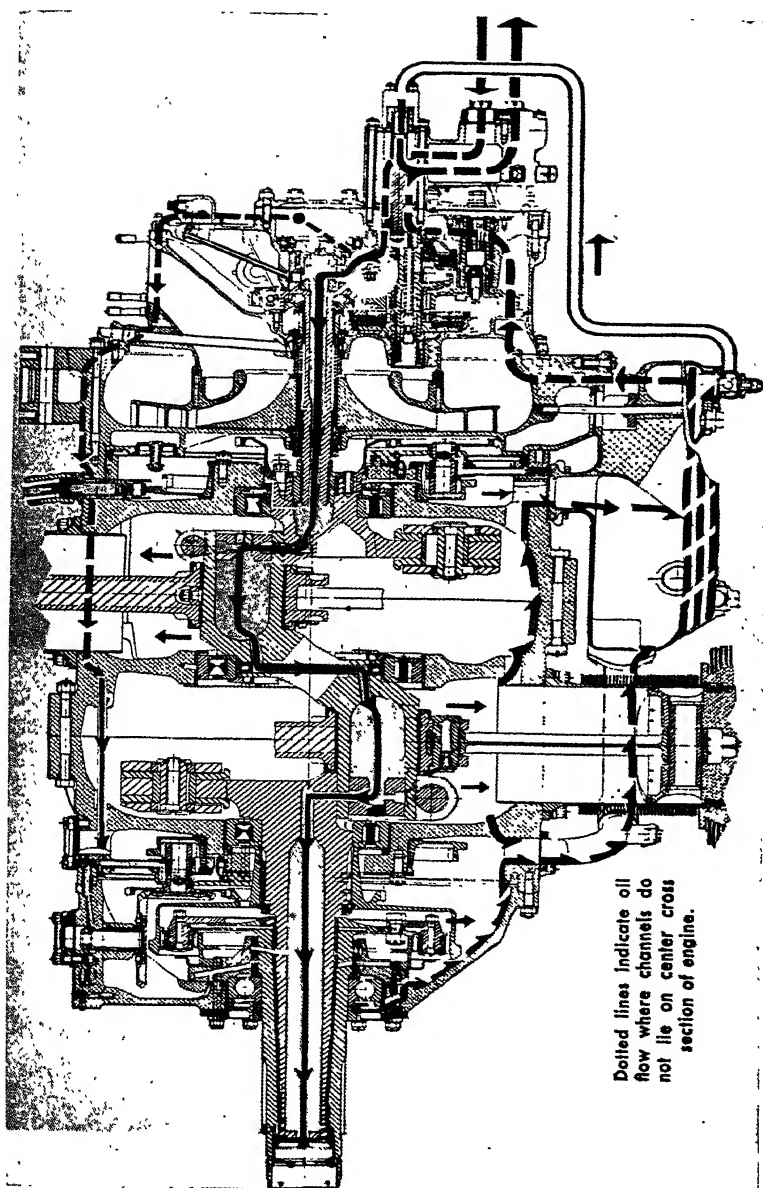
Lubrication system of Wright C14B twin-row radial engine. (Wright Aeronautical Corp.)
